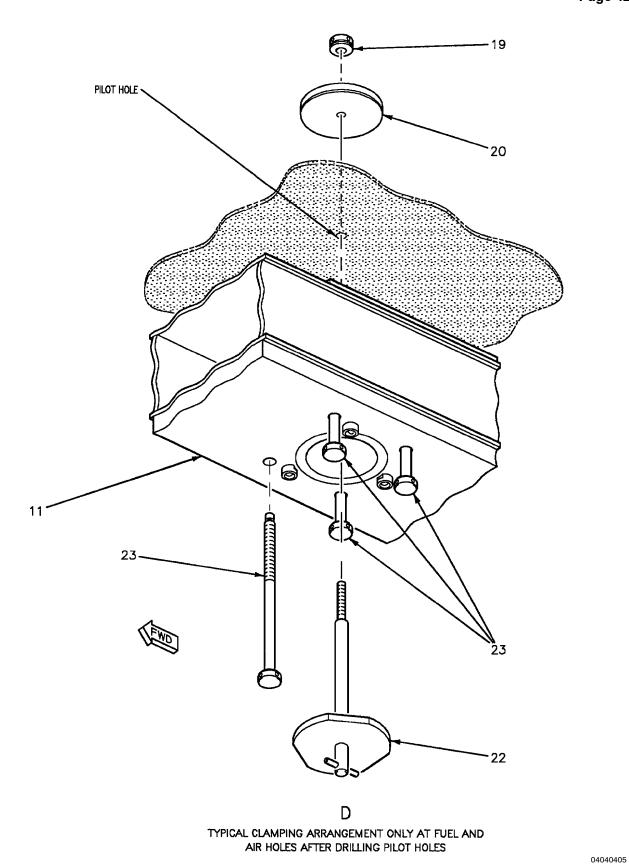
Drilling Holes at Inboard and Outboard Pylon Positions (Sheet 5)
